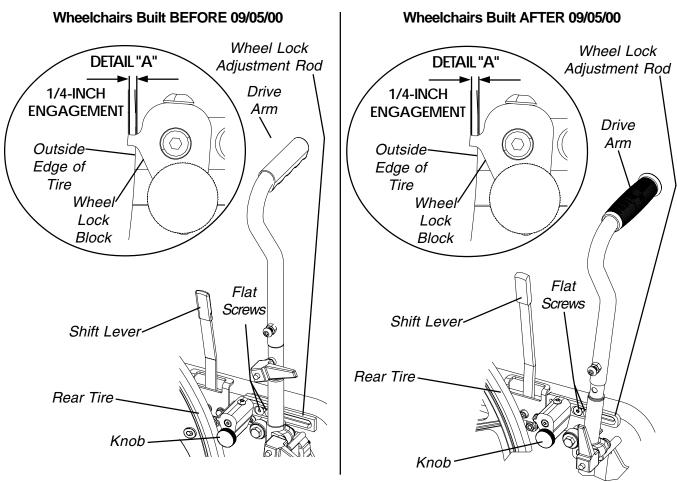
ADJUSTING WHEEL LOCK ENGAGEMENT POSITION
